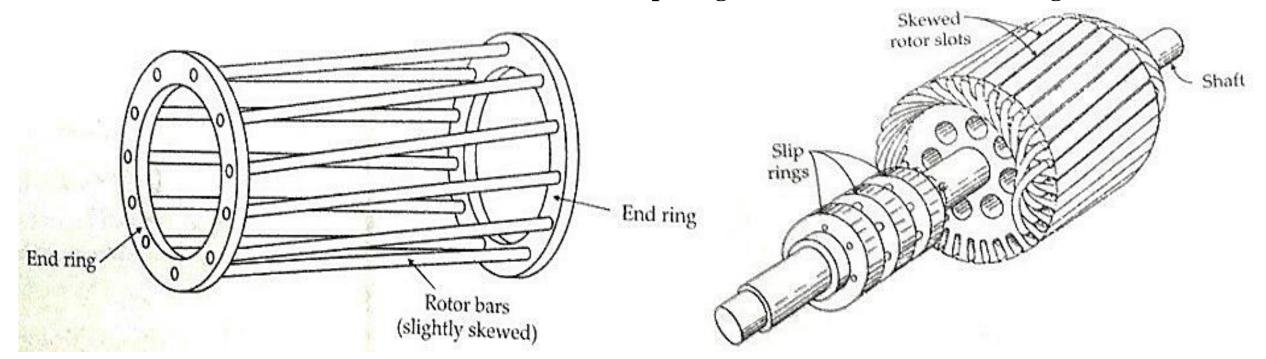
Squirrel Cage Induction Motor (SCIM)
